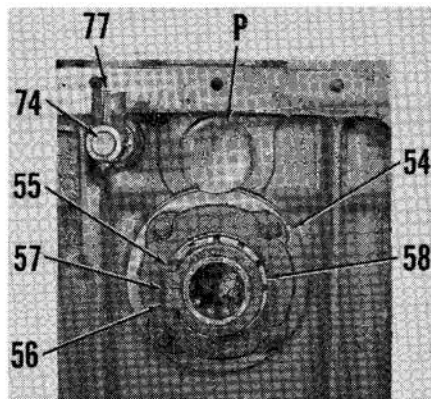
View of rear end of main transmission showing plug (P) located behind upper shaft bearing (63—Fig. 140). Refer also to Fig. 143. Refer to Fig. 140 for legend.
